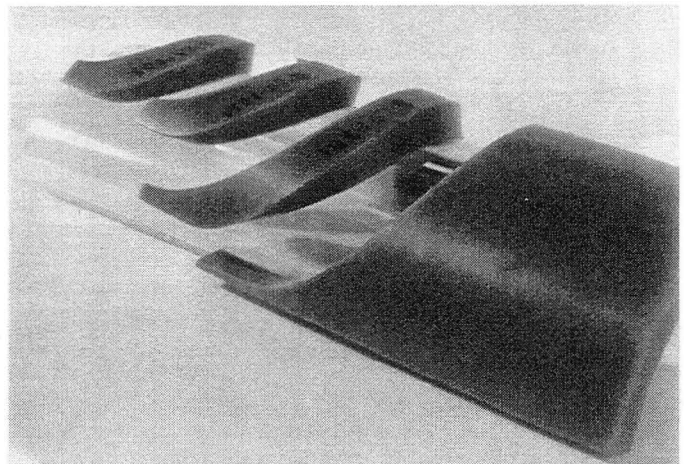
View of WAX spacers machined by a 5-axis milling machine.
